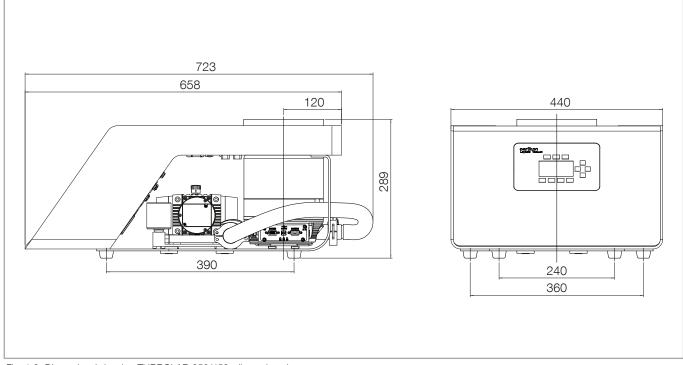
Dimensional drawing TURBOLAB 350/450, dimensions in mm
